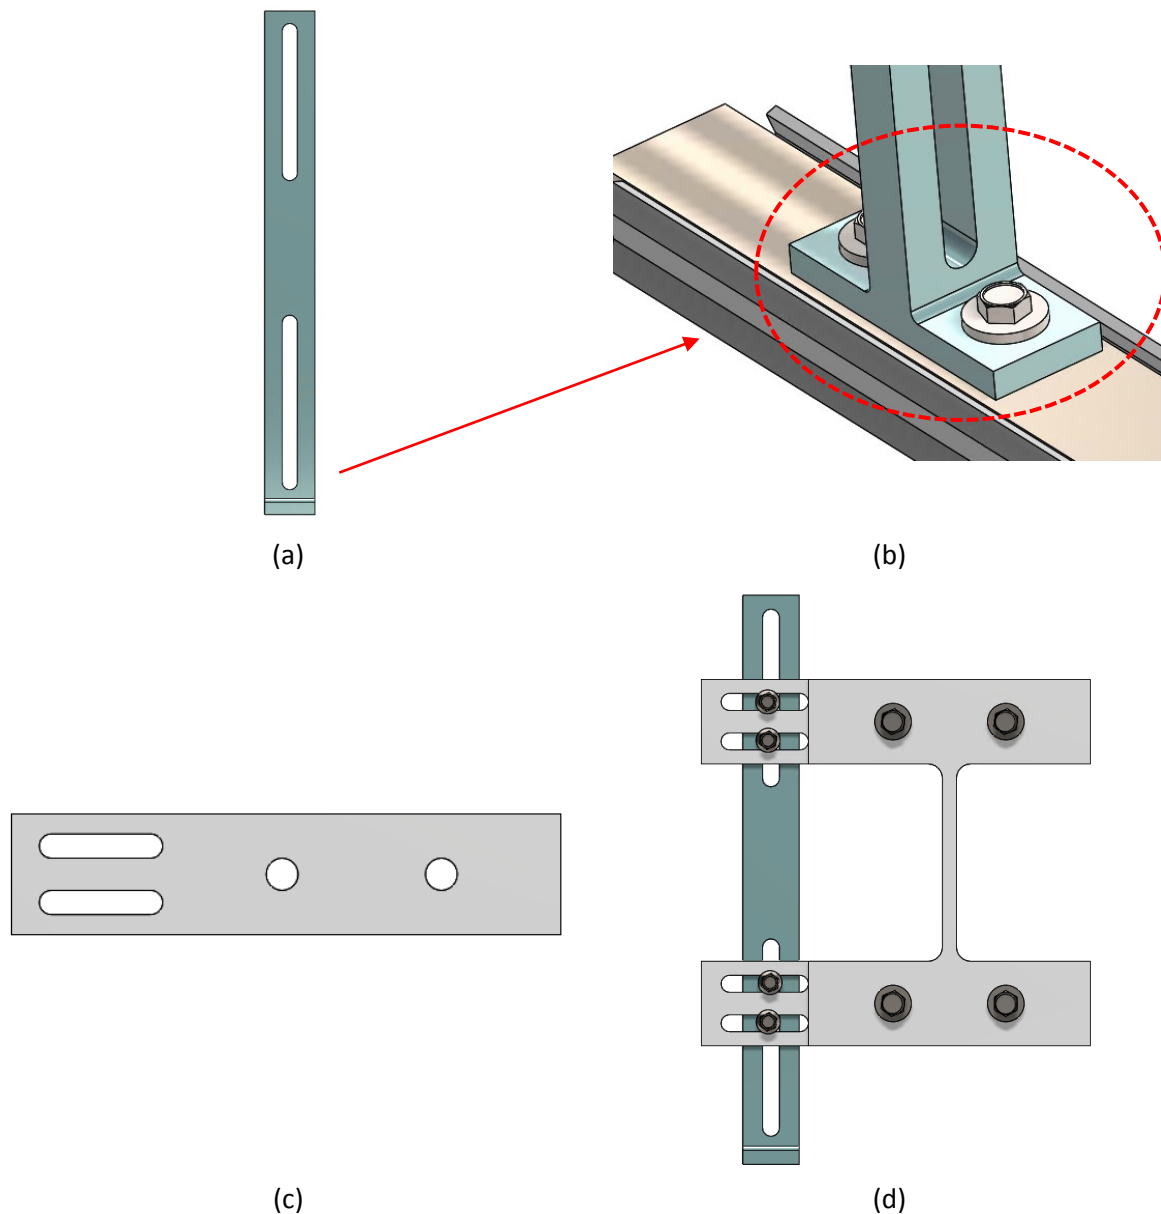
Original version of workpiece support: (a) central rod (b) T shape bottom (c) workpiece holders (d) assembled.
